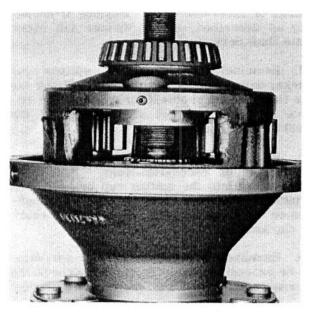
Special Tool MFN 265 and MFN 764-3 in Position
